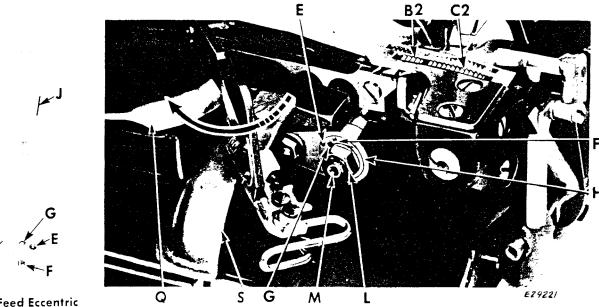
Feed Eccentric Extractor 164203 and Eccentric 164915, bronze
